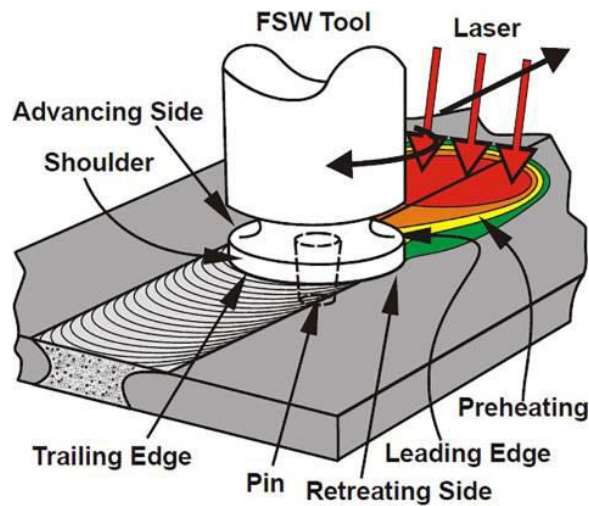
Schematic illustration of principle of laser assisted friction stir welding [151].
